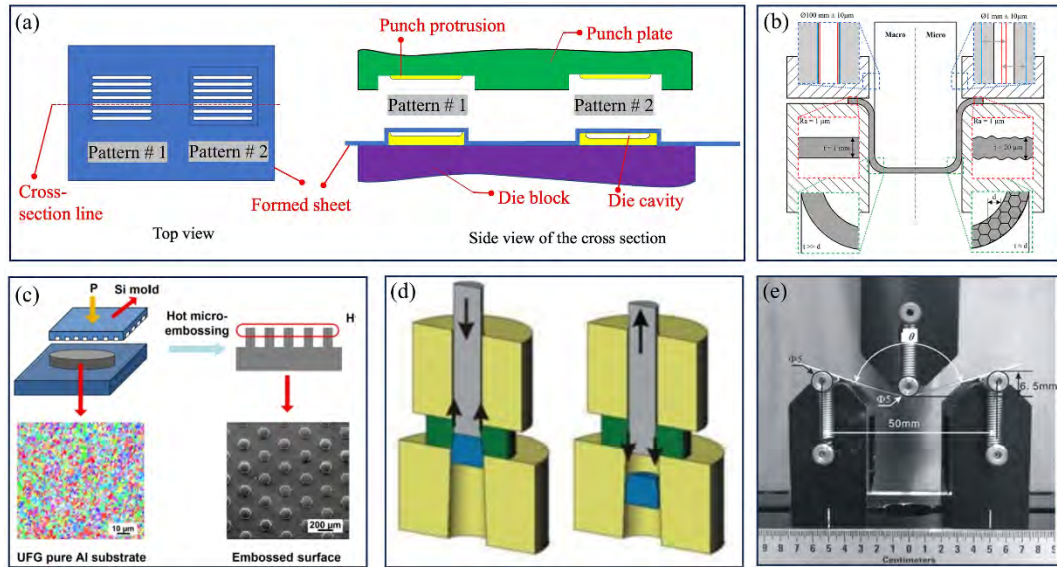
Common meso/micro-scaled sheet metal-forming: (a) meso/micro-stamping [51], (b) meso/micro-deep drawing [52], (c) meso/micro-embossing [53], (d) meso/micro-blanking/heading [54], and (e) meso/micro-bending [6].
